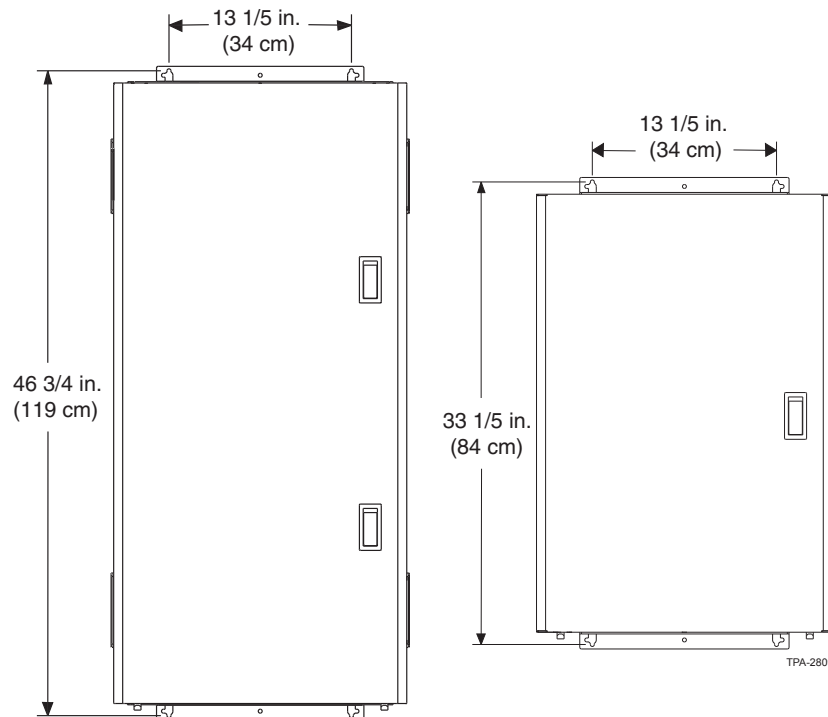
Remove and Reattach Brackets for Wall Mounting
